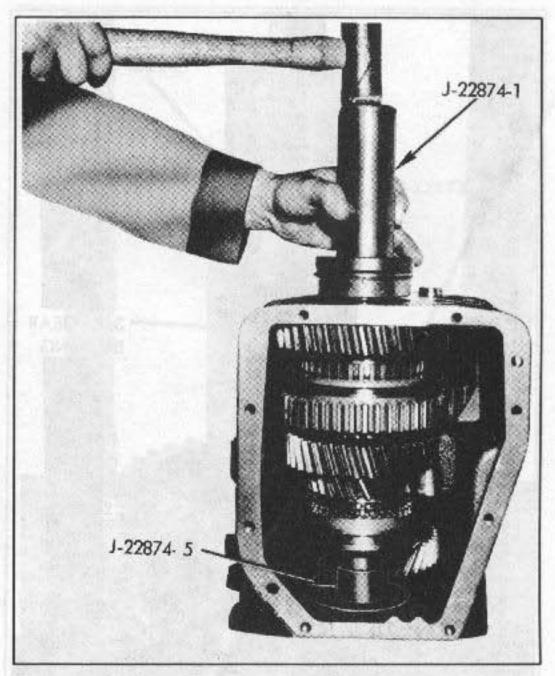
B-23L-Installing Mainshaft Rear Bearing
